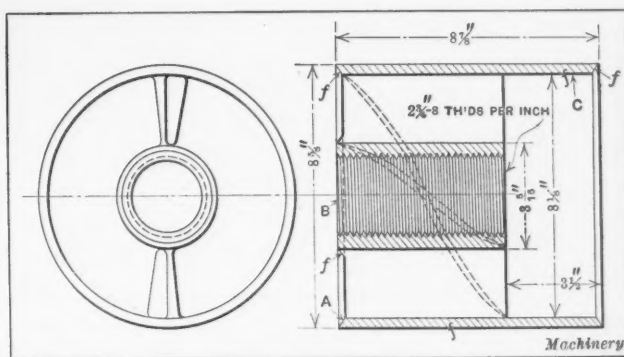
Detailed View of a Pump Lifter, the Tooling Lay-out for which is shown in Fig. 17
